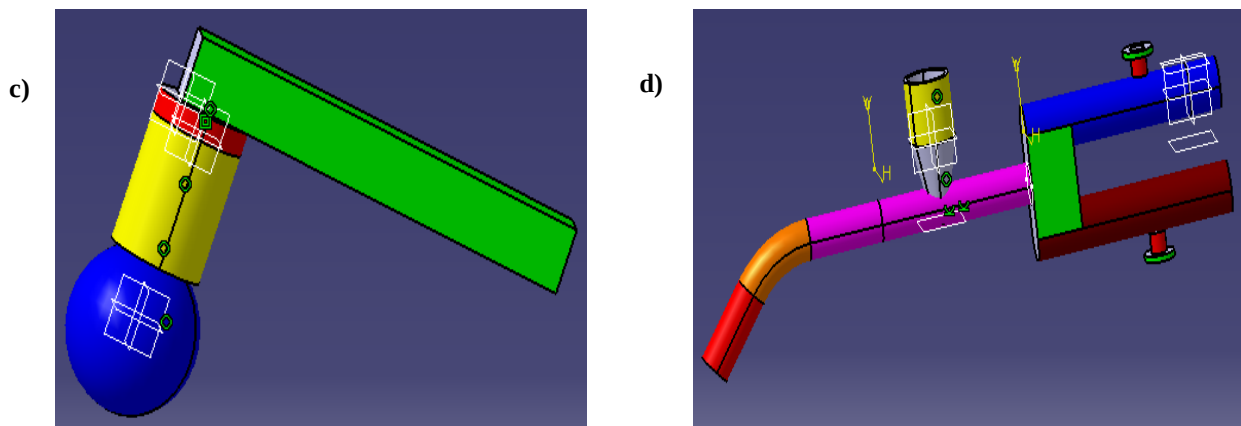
CATIA V5 3D designs of (c) Bearing ball reinforced spring and control valve unit, and (d) Assembly drawing of the powder supply control valve unit
